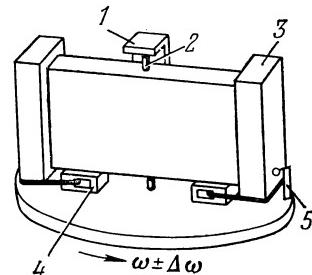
Instrument for measuring the kinematic accuracy of machine tools by the seismic method
